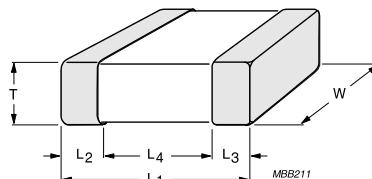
Surface mounted multilayer ceramic capacitor dimension
